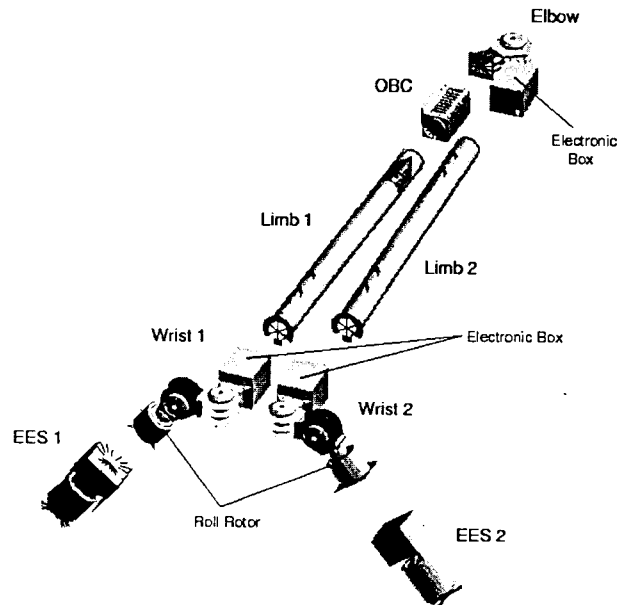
Exploded view of ERA in the launch configuration (By courtesy of DLR)
